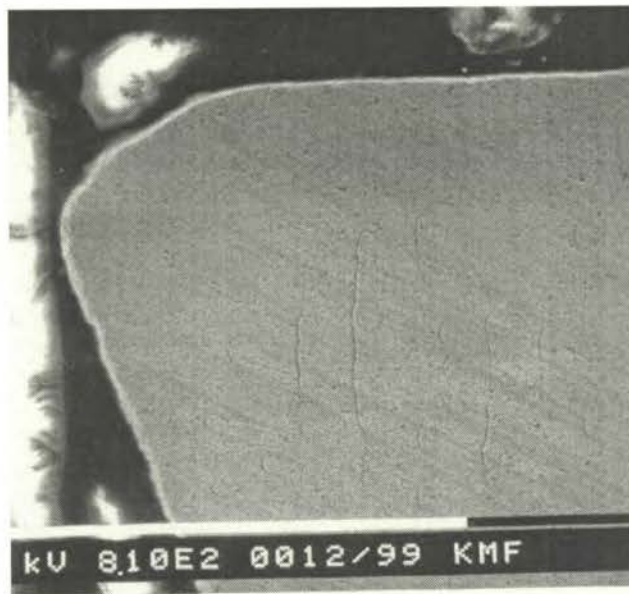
15 Rake face of a KC994M tool which become highly susceptible to crack initiation, plucking and fracture after cutting Inconel 718 for 22 minutes at 25 m/min and 0.14 mm/tooth.
